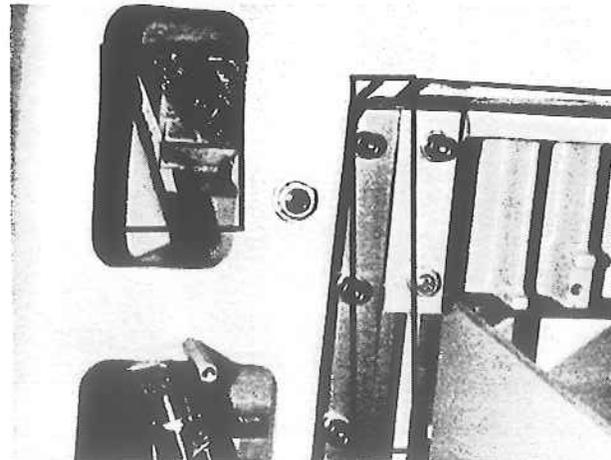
Upper - Cylinder Pins - Lower (fig. 39)
